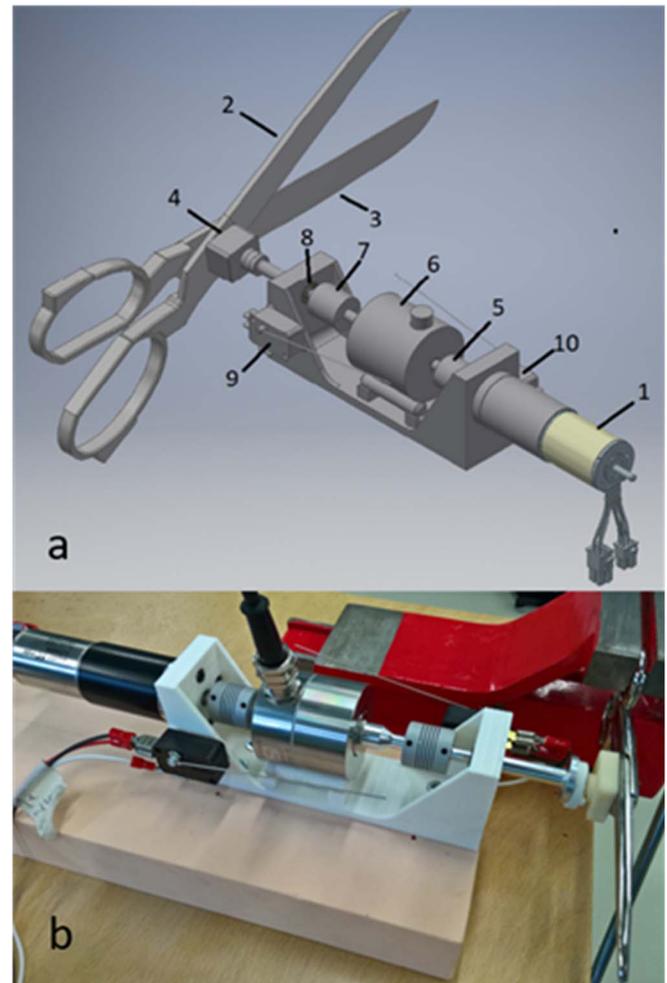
CAD drawing (a) and pictorial view (b) of the proposed machine for assessing the cutting efficiency of scissors.
